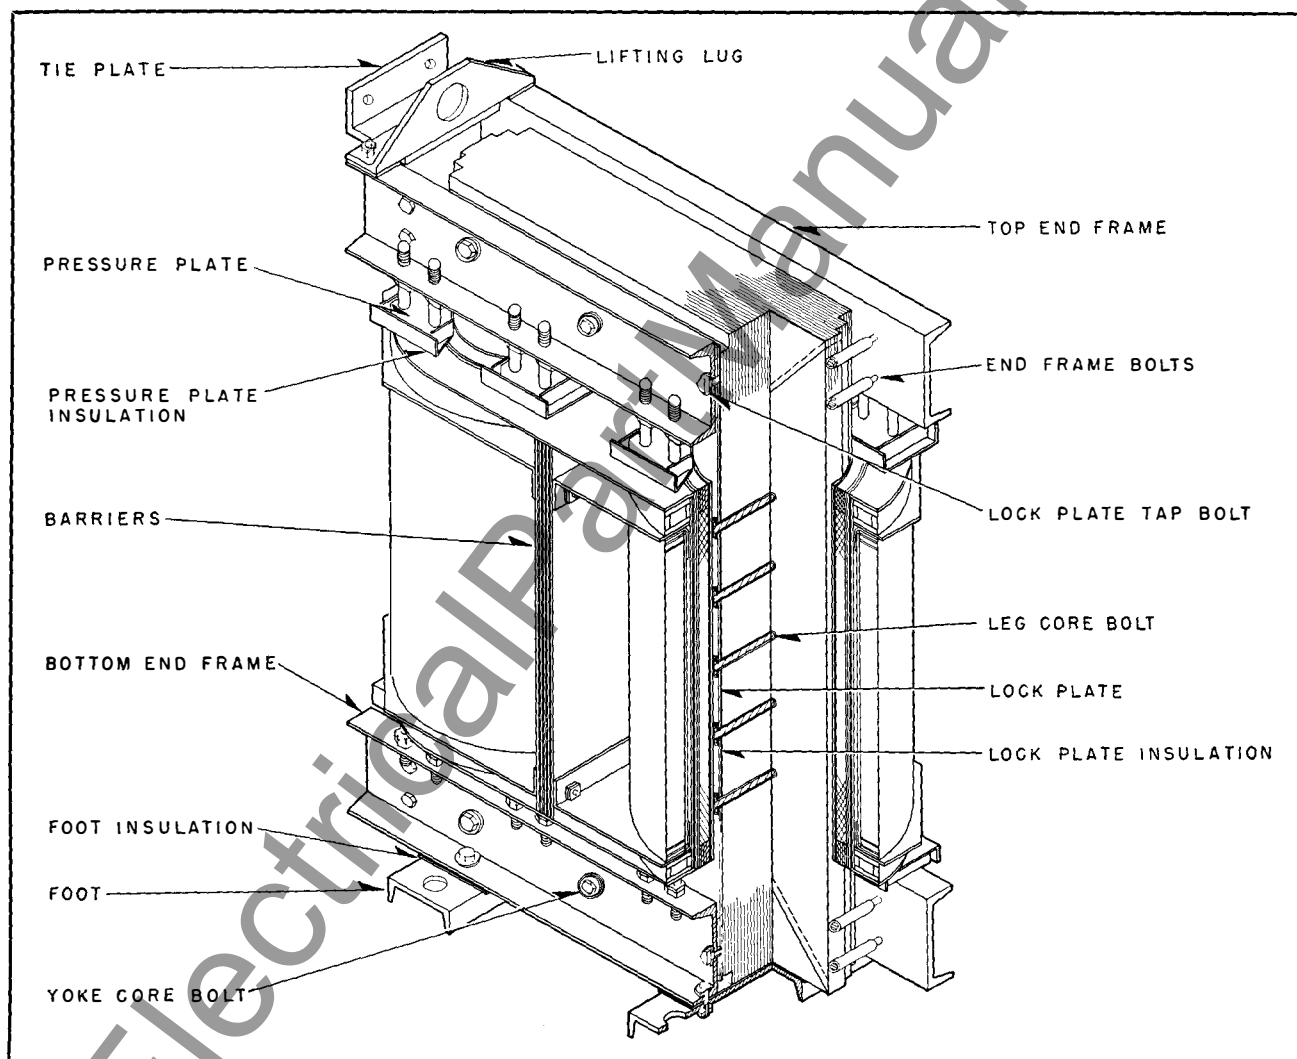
Sectional View of a Single-Phase Core Form Transformer.
